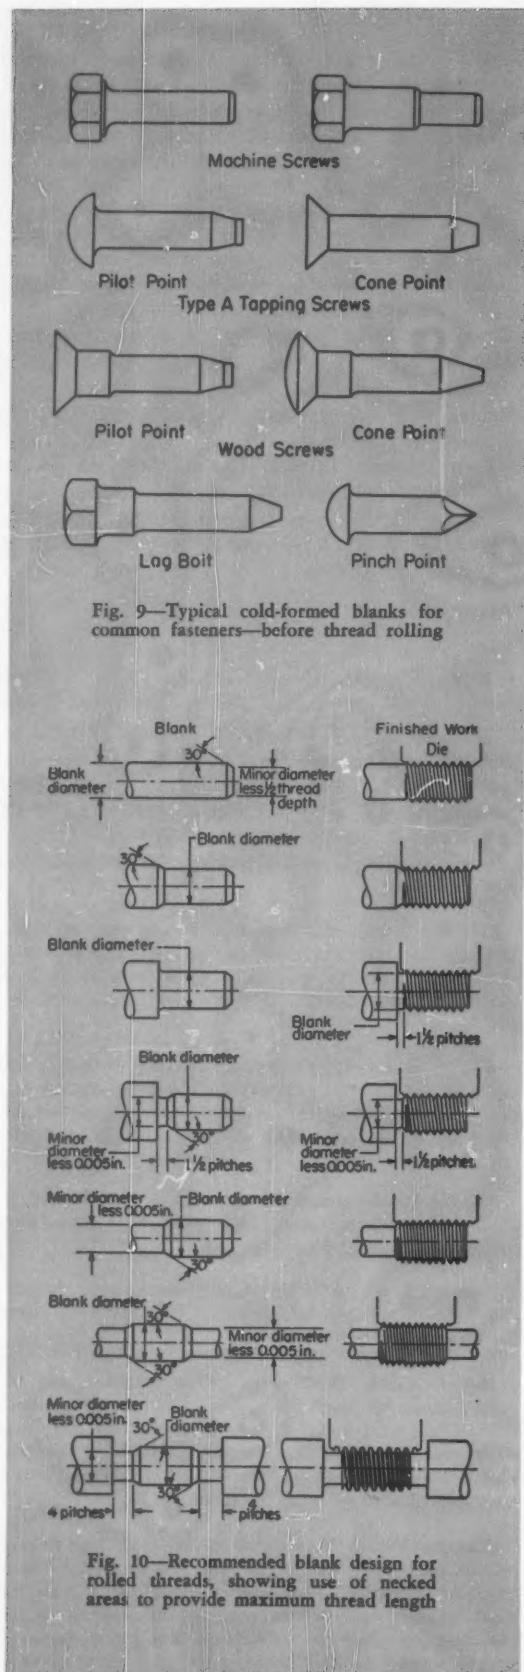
Typical cold-formed blanks for common fasteners—before thread rolling
